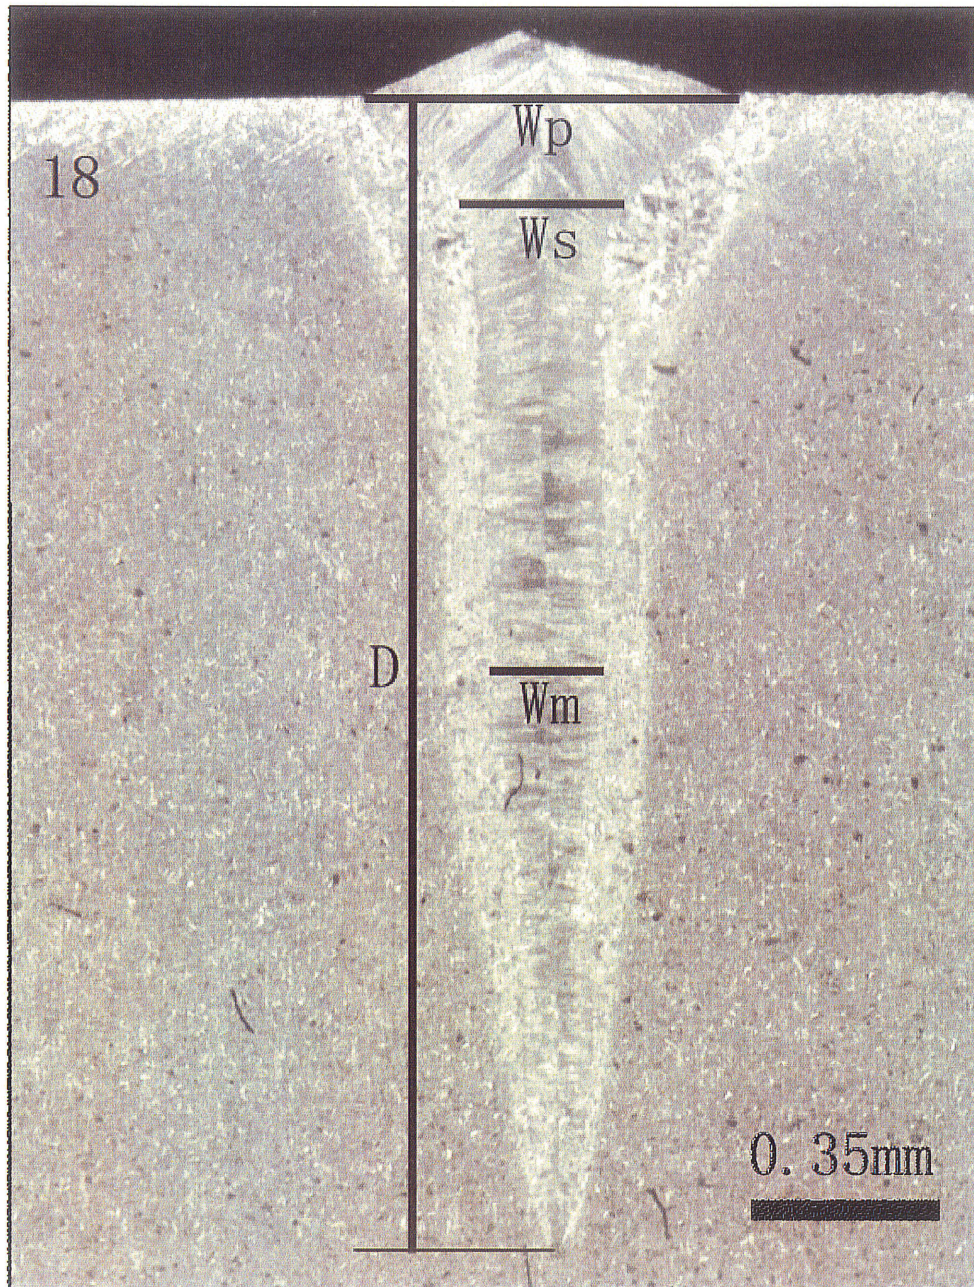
A typical nail-head shape of weld obtained with EB welding and its geometrical parameters.
